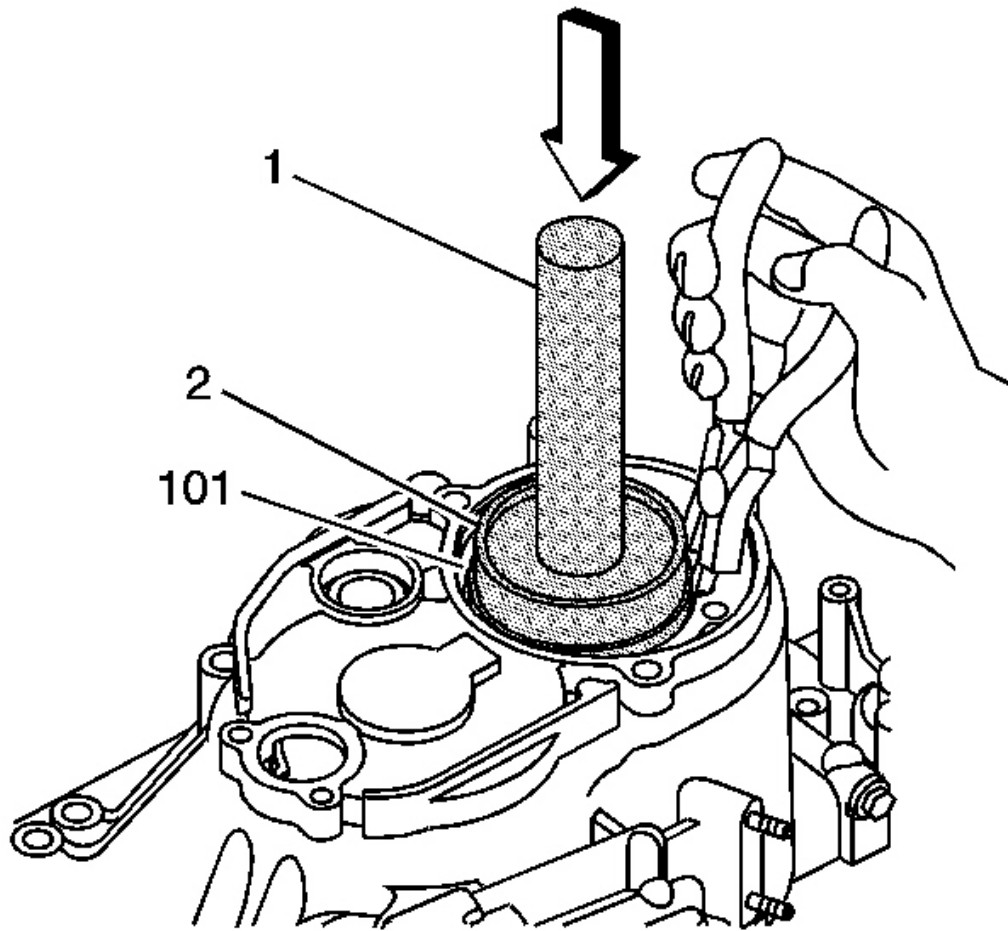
Expanding The Mainshaft Rear Bearing Retaining Ring Using Pliers
